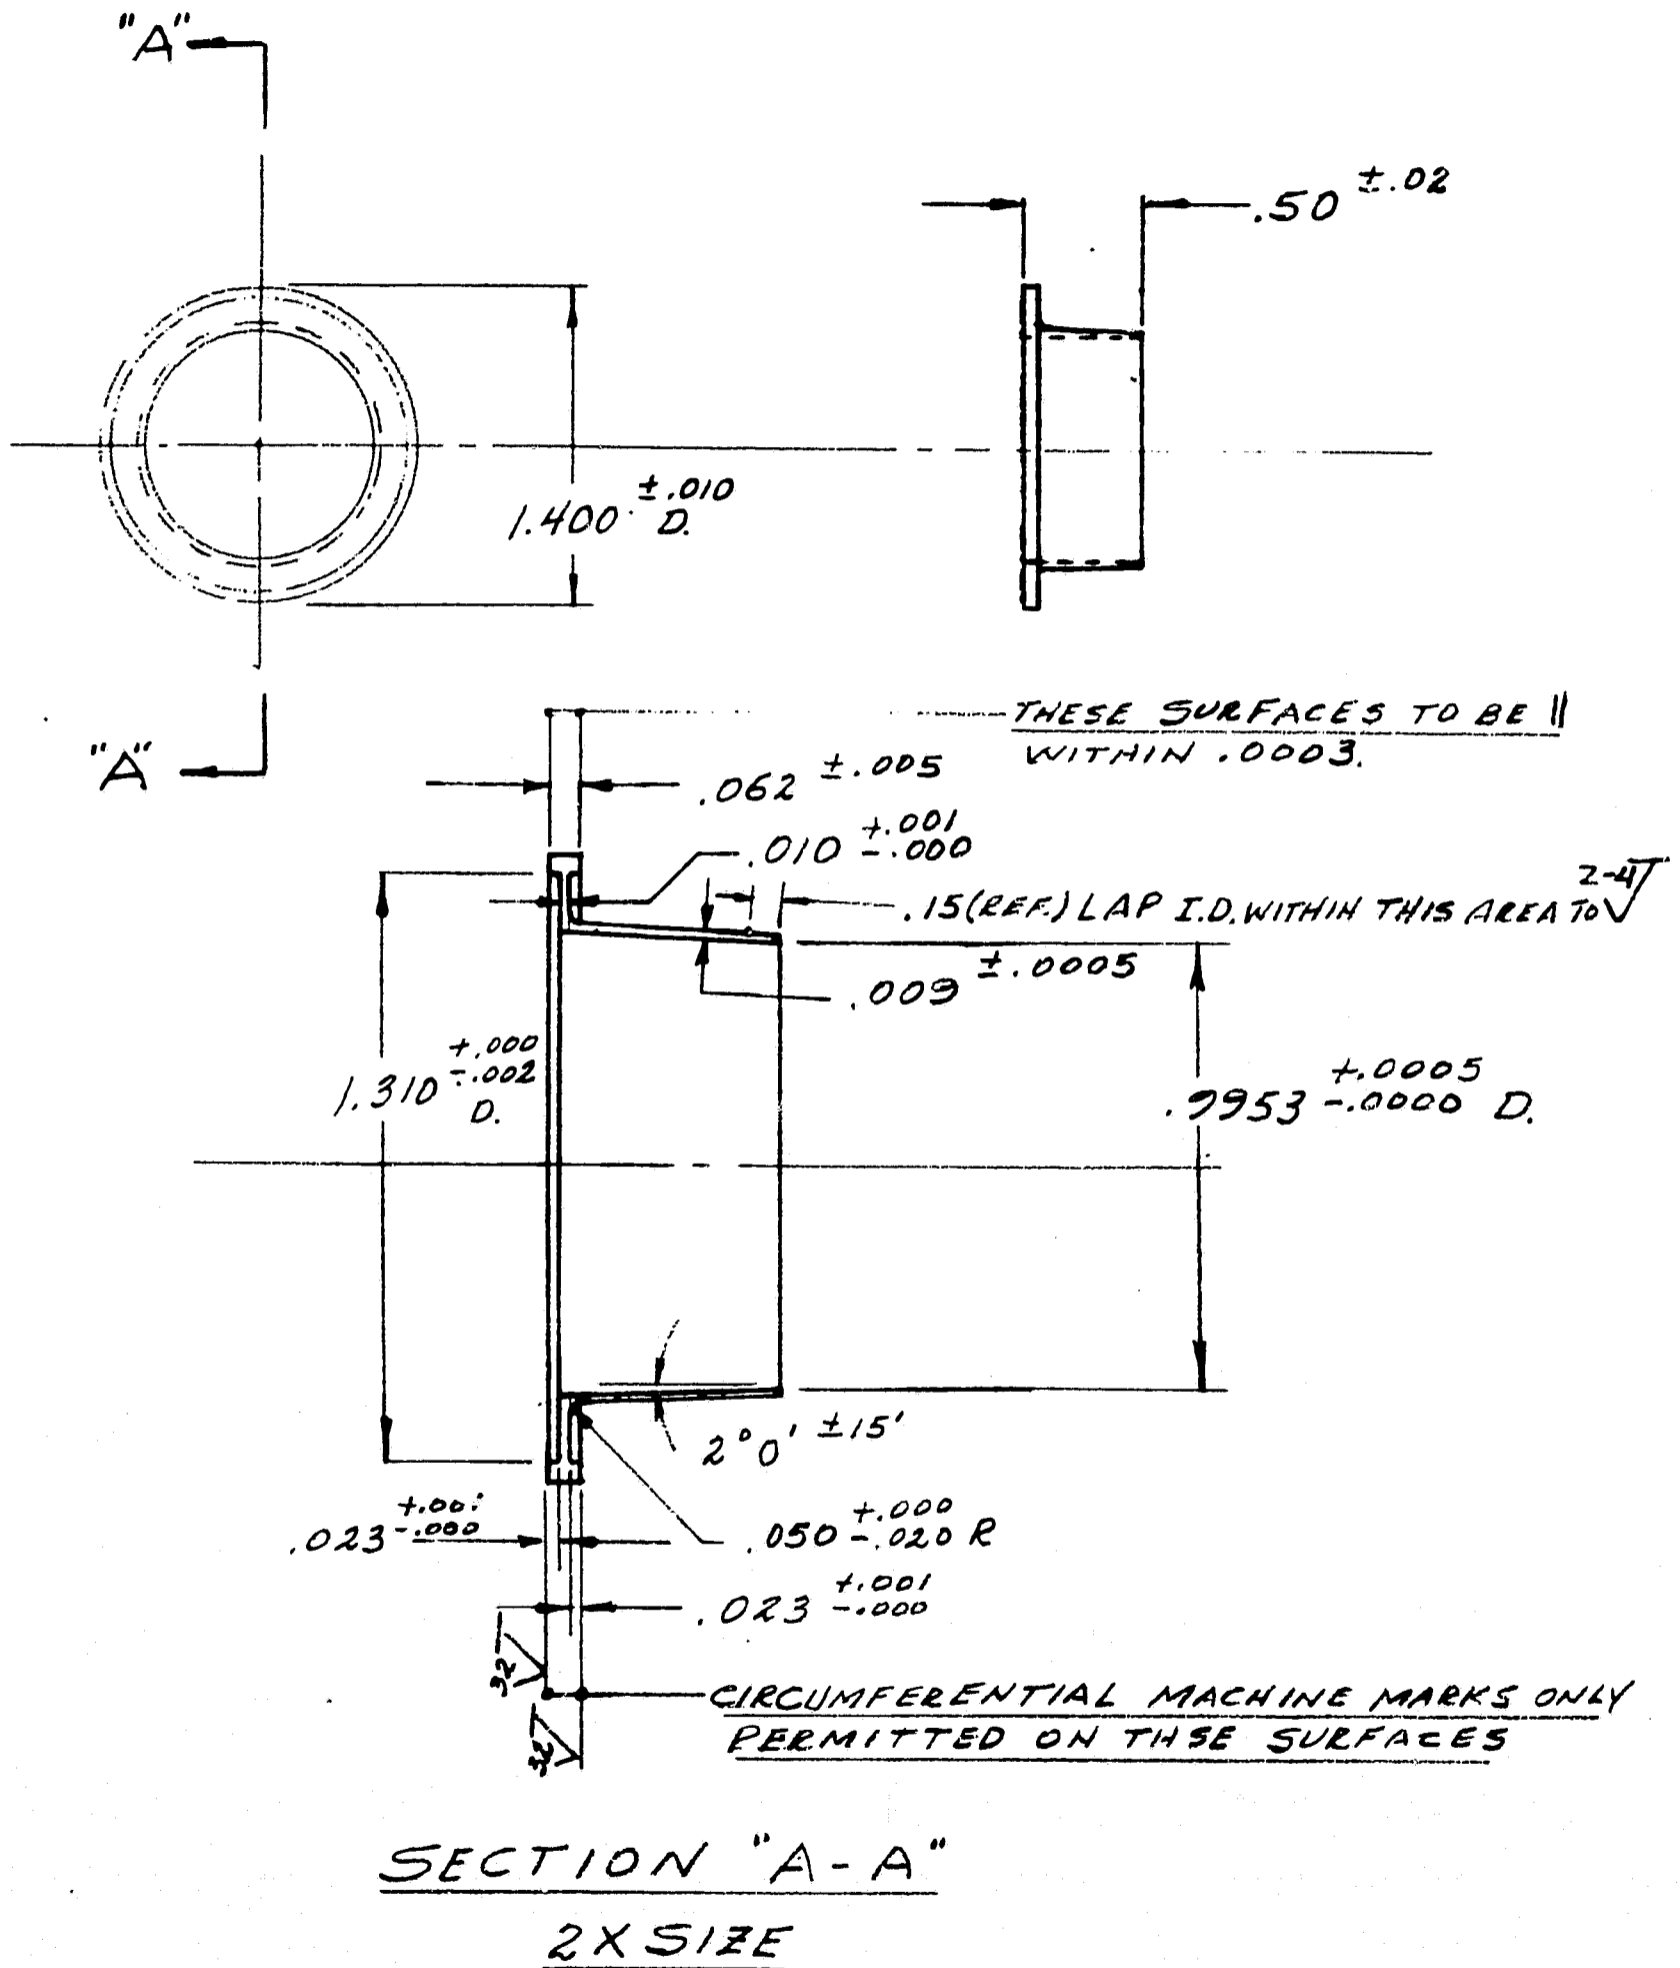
Vascojet 1000 Lip Seal (Modified Flange)
